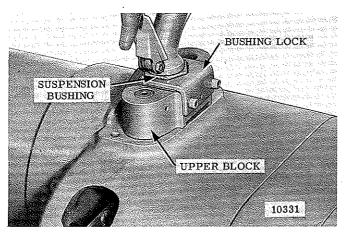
View of Upper Hook Assembled To Hoist Frame (2 Ton Models)
